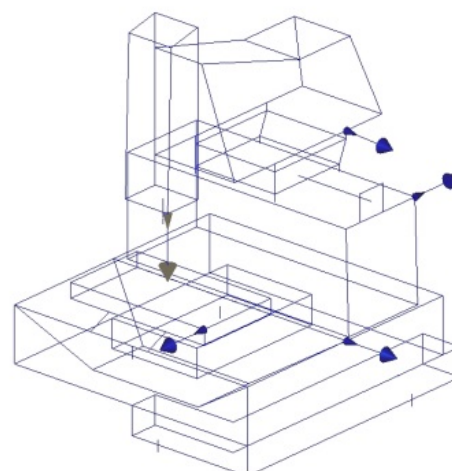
Wire frame model as discretization of the machine tool, (reference sensors are marked with arrows)
